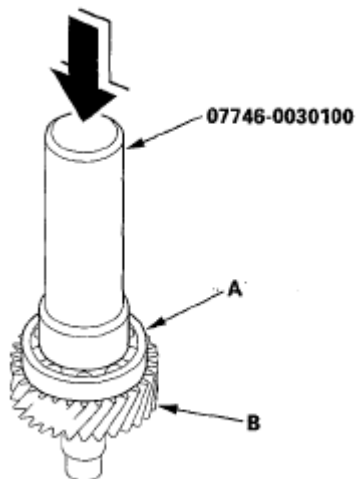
Pressing Bearing Onto Transfer Output Shaft
